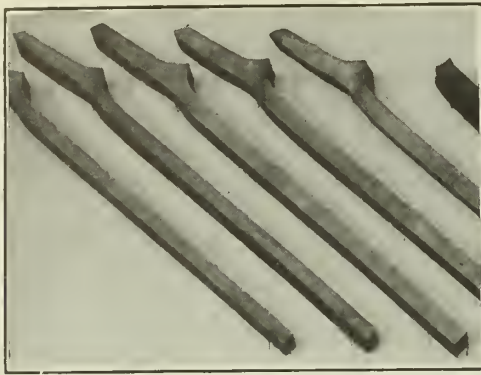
Tensile Test Bars per A.S.M.E. Standard Taken from Section of Lapped Pipe.
